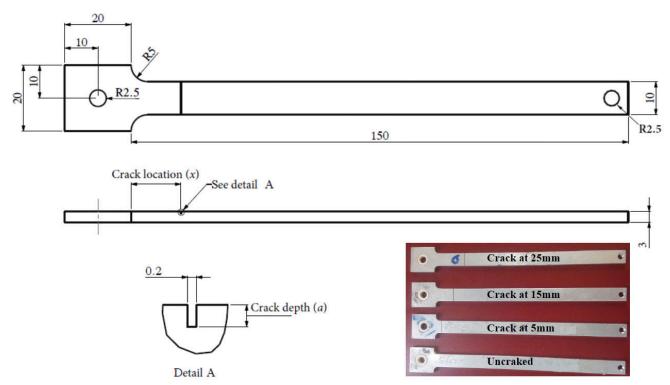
Dimensions of the specimen (in mm), inset is showing the manufactured specimen.
